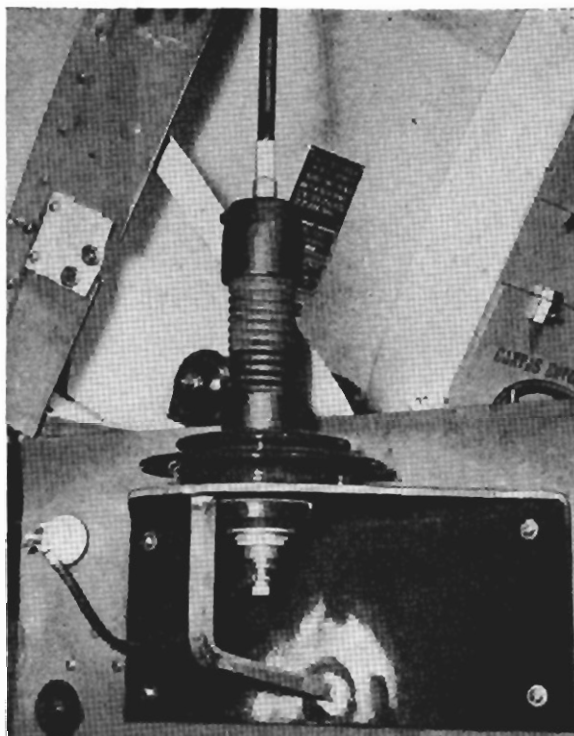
Method of mounting a type MP-37 whip assembly on an MAM equipment.
